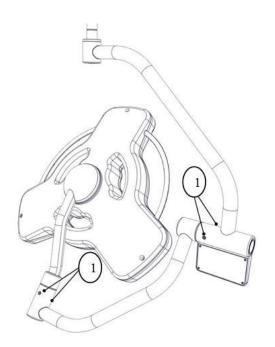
Light Head Short Arm, Long Arm Brake Adjustment
